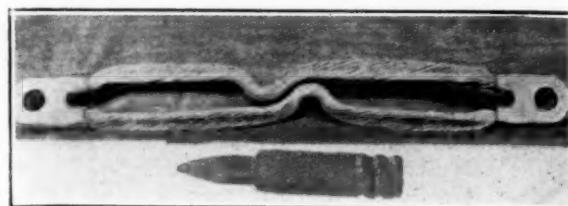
RAIL BOND AND CALORIZED SOLDERING COPPER
